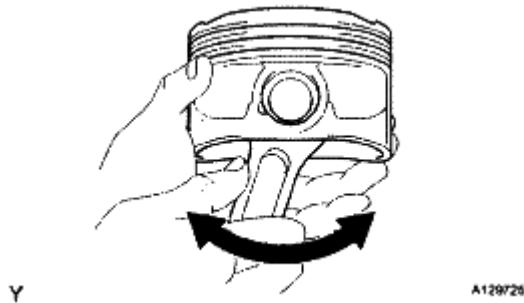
Checking Fitting Condition Between Piston And Piston Pin
